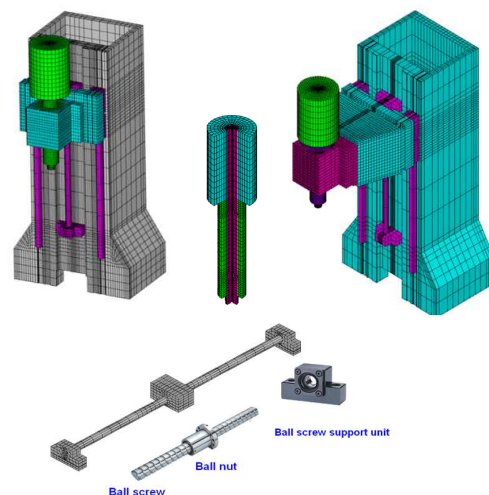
Finite element models of the milling machine with different spindle head stock, illustrating the machine frame integrated with the spindle-bearing model
